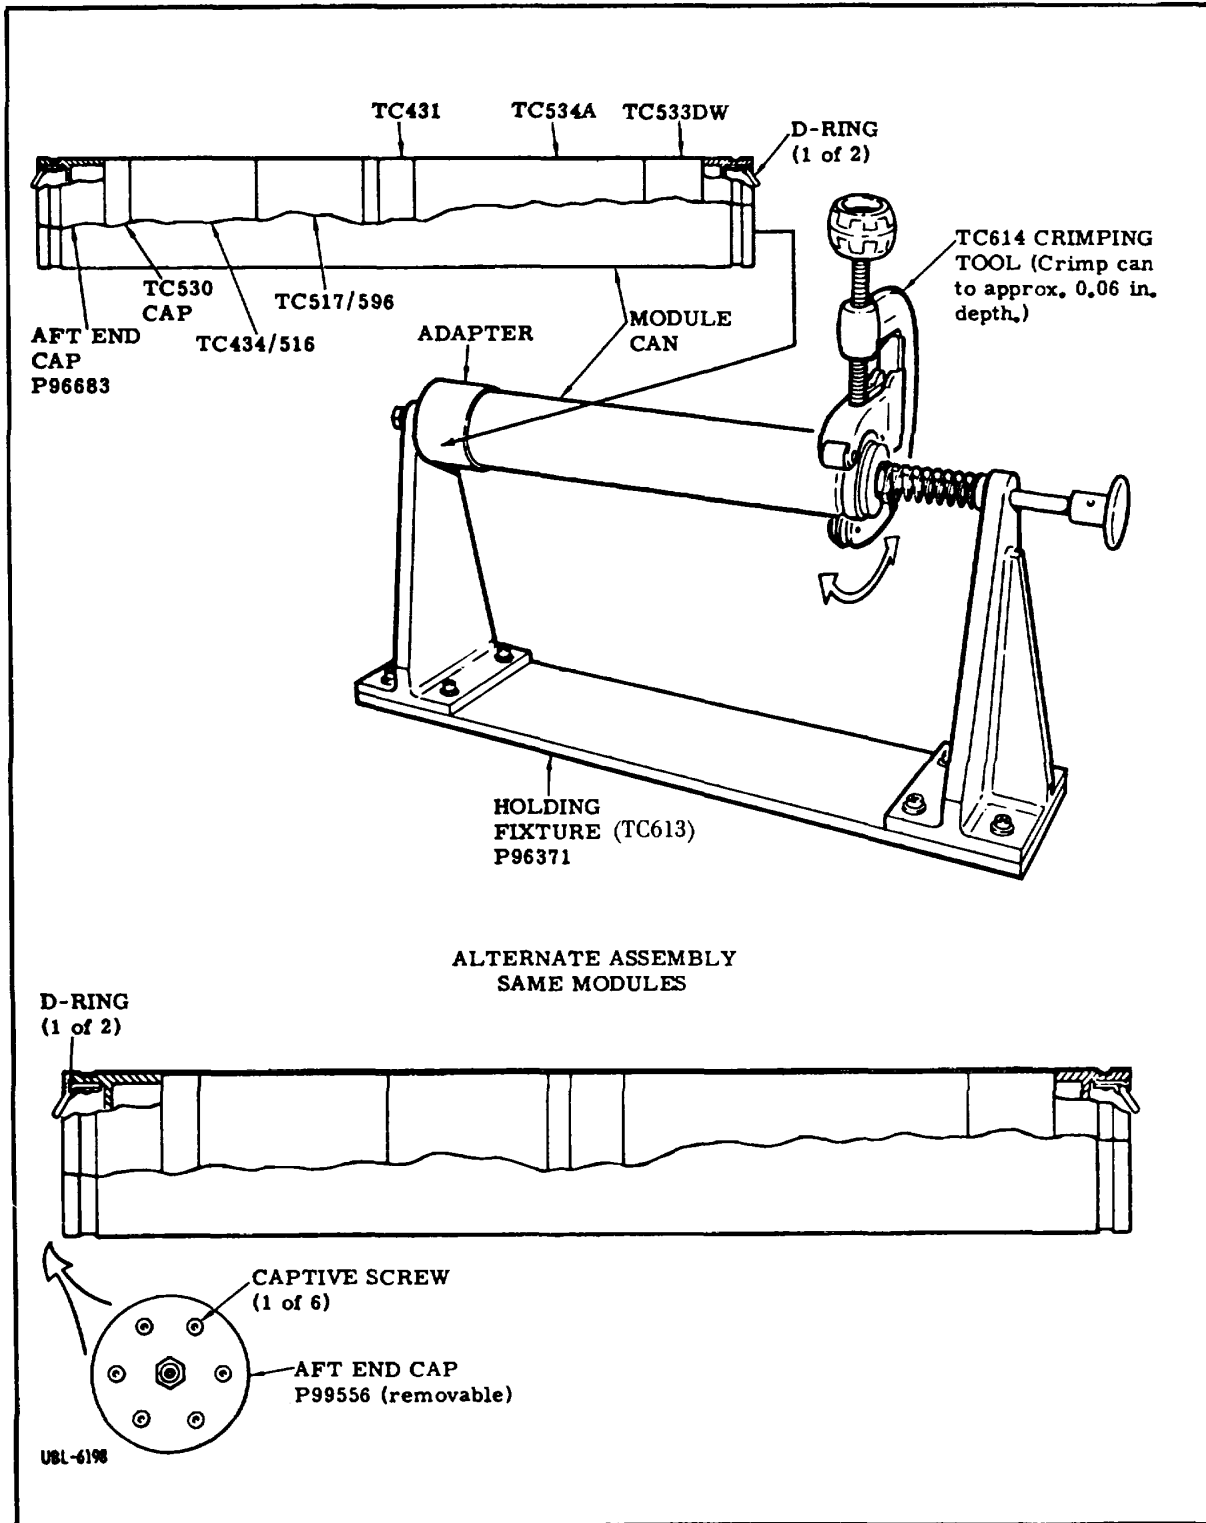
G. MA87 EXTRA Y Module Can Assembly
